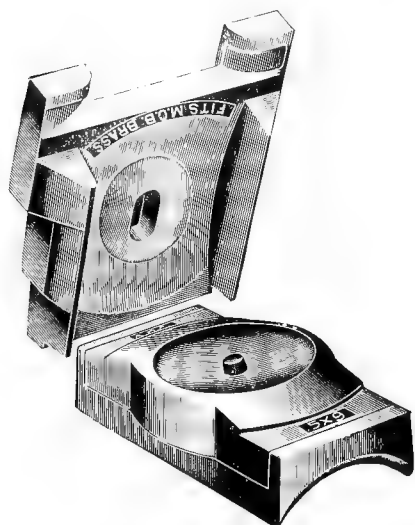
A. B. C. Journal Bearing and Wedge. A. B. C. Bearing Corporation.
